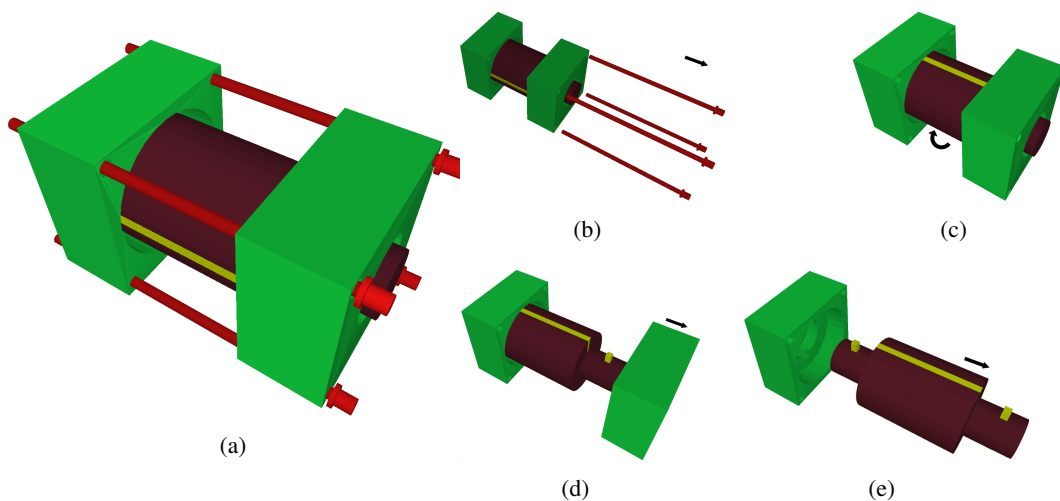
Disassembly Sequence of the 7-part Simplified Engine: (a) Assembled configuration, (b)(c)(d)(e) Four disassembly sub-paths. Sub-path (c) makes the disassembly sequence be non-monotonic.
